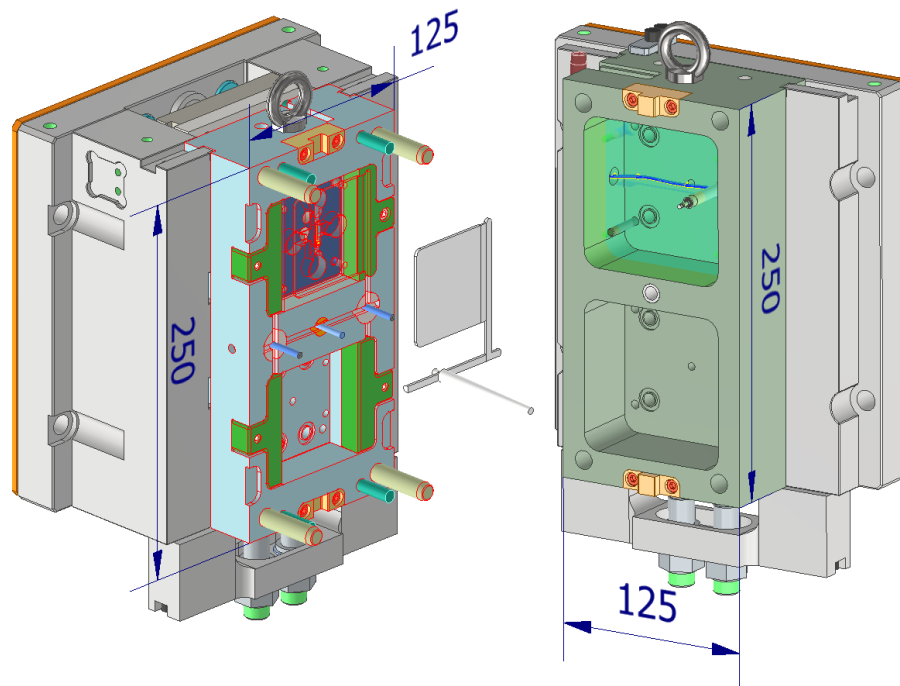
The moving half and the fixed half of the test mould and the injection moulded product.
